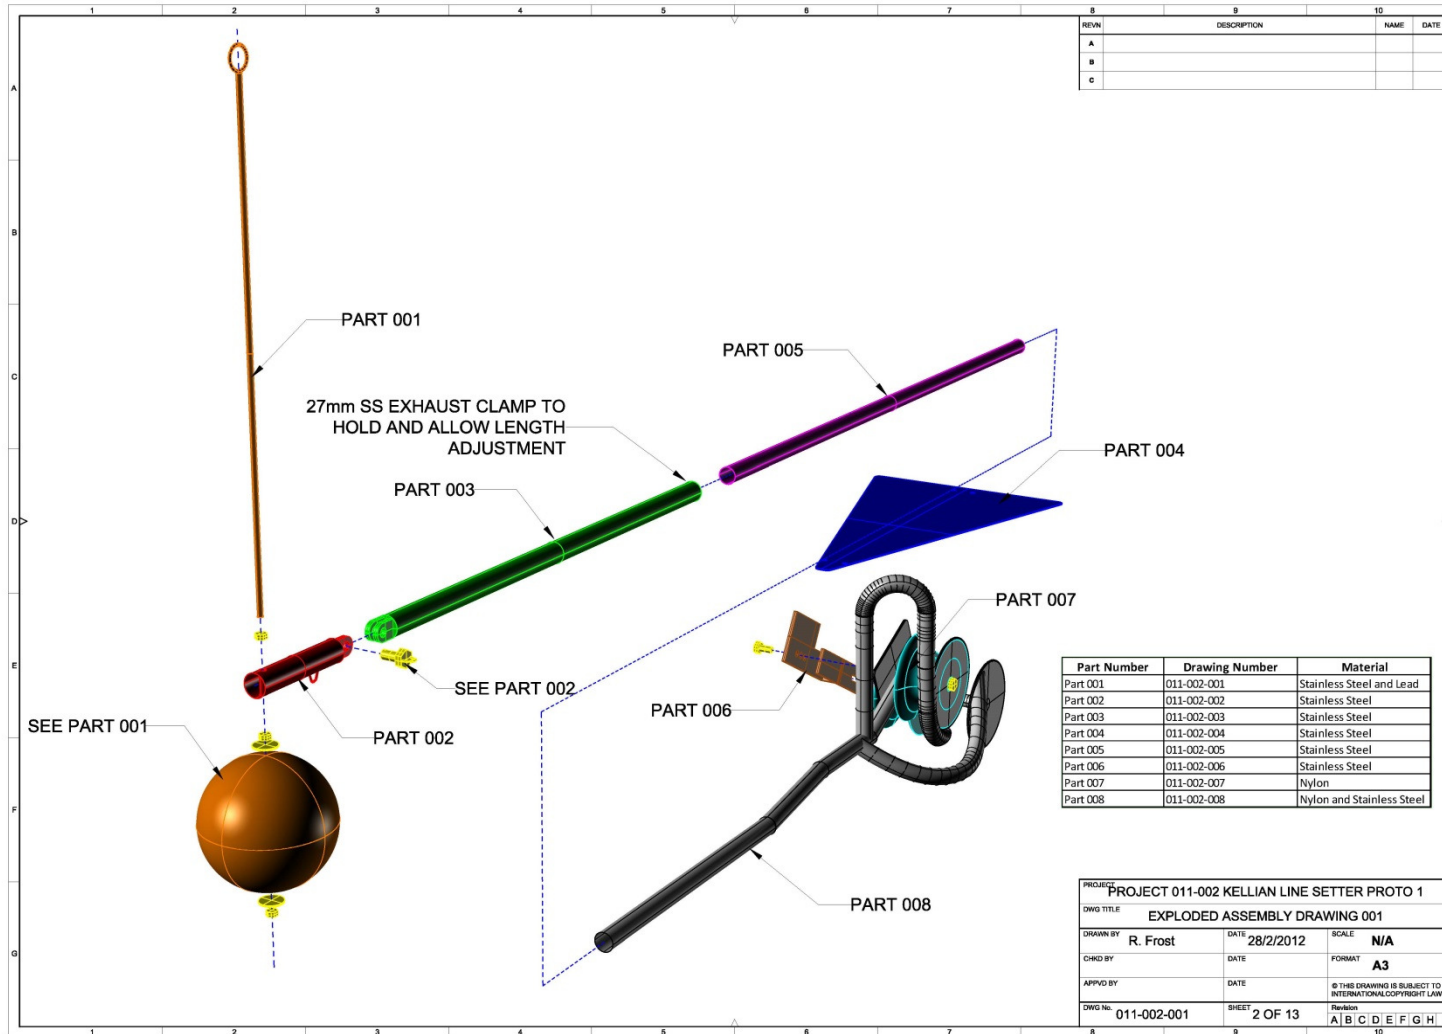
Exploded assembly drawing of Kellian Line Setter Prototype 1
